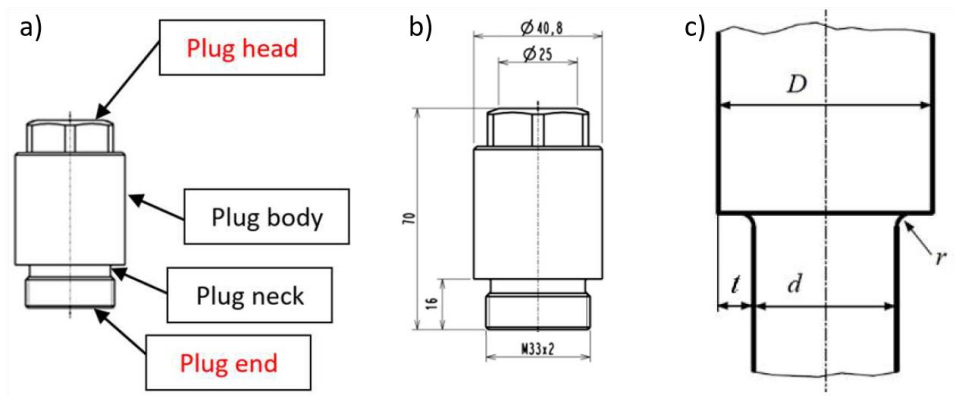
(a) plug parts, (b) plug drawing, (c) sketch of the standard detail
